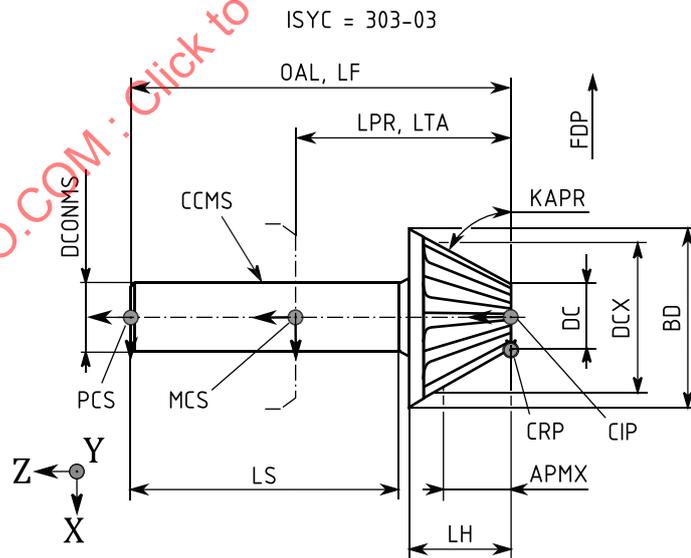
ISYC 303-03 - Angular end mill, V-groove, solid
